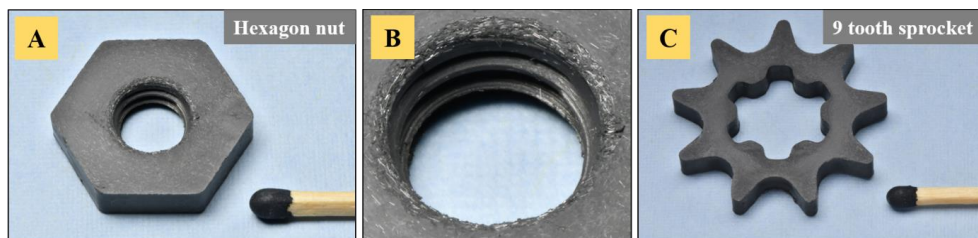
5: Powder injection molded Ti_2AlC -based components: (A) M8 hexagon nut, (B) magnified threaded hole and (C) 9-tooth sprocket.
